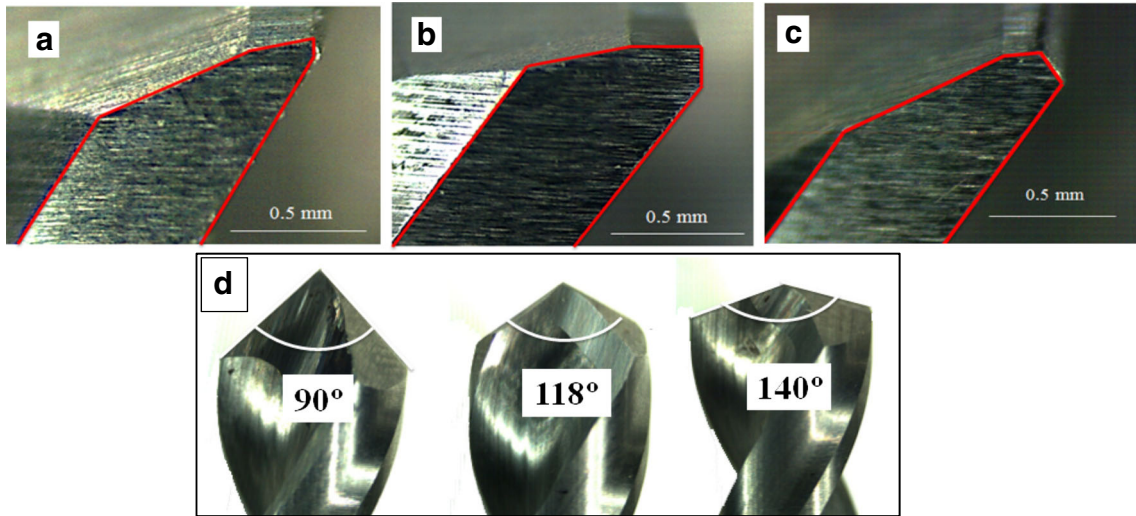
Edge geometries of drill bits tested; a new tool, b honed edge tool, and c flank worn tool. Under each tool type, three point angles (90°, 118°, and 140°) were chosen as shown in d for the new tool case
